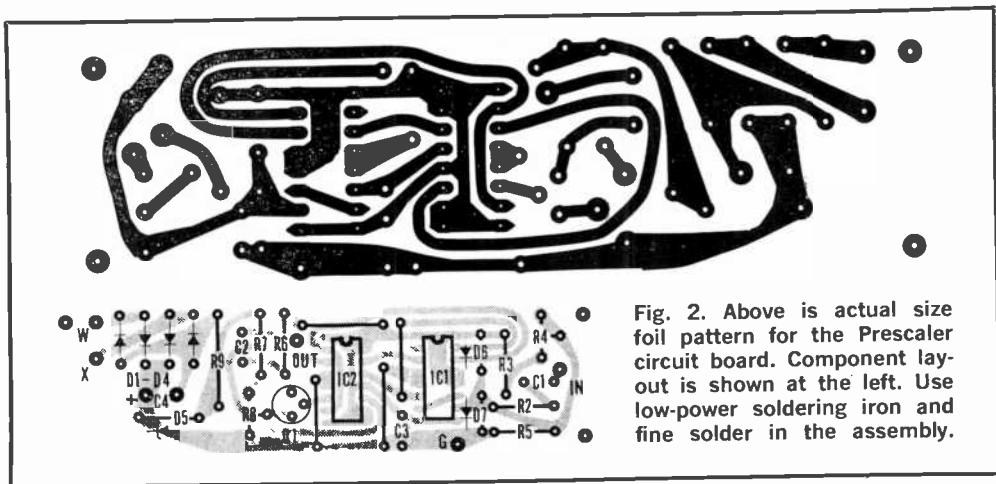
Above is actual size foil pattern for the Prescaler circuit board. Component layout is shown at the left. Use low-power soldering iron and fine solder in the assembly.
